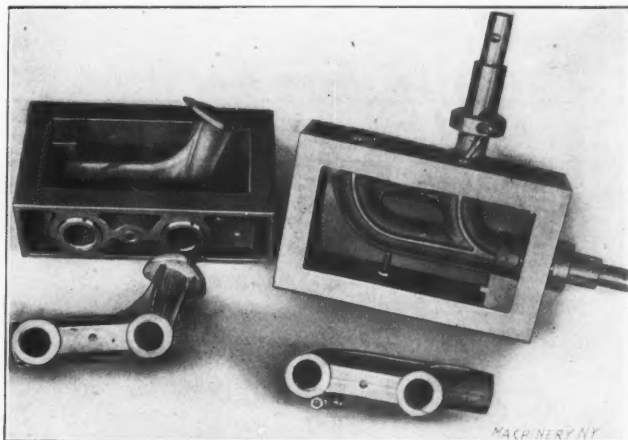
Drilling Jigs for Two Different Shapes of Exhaust Manifolds
